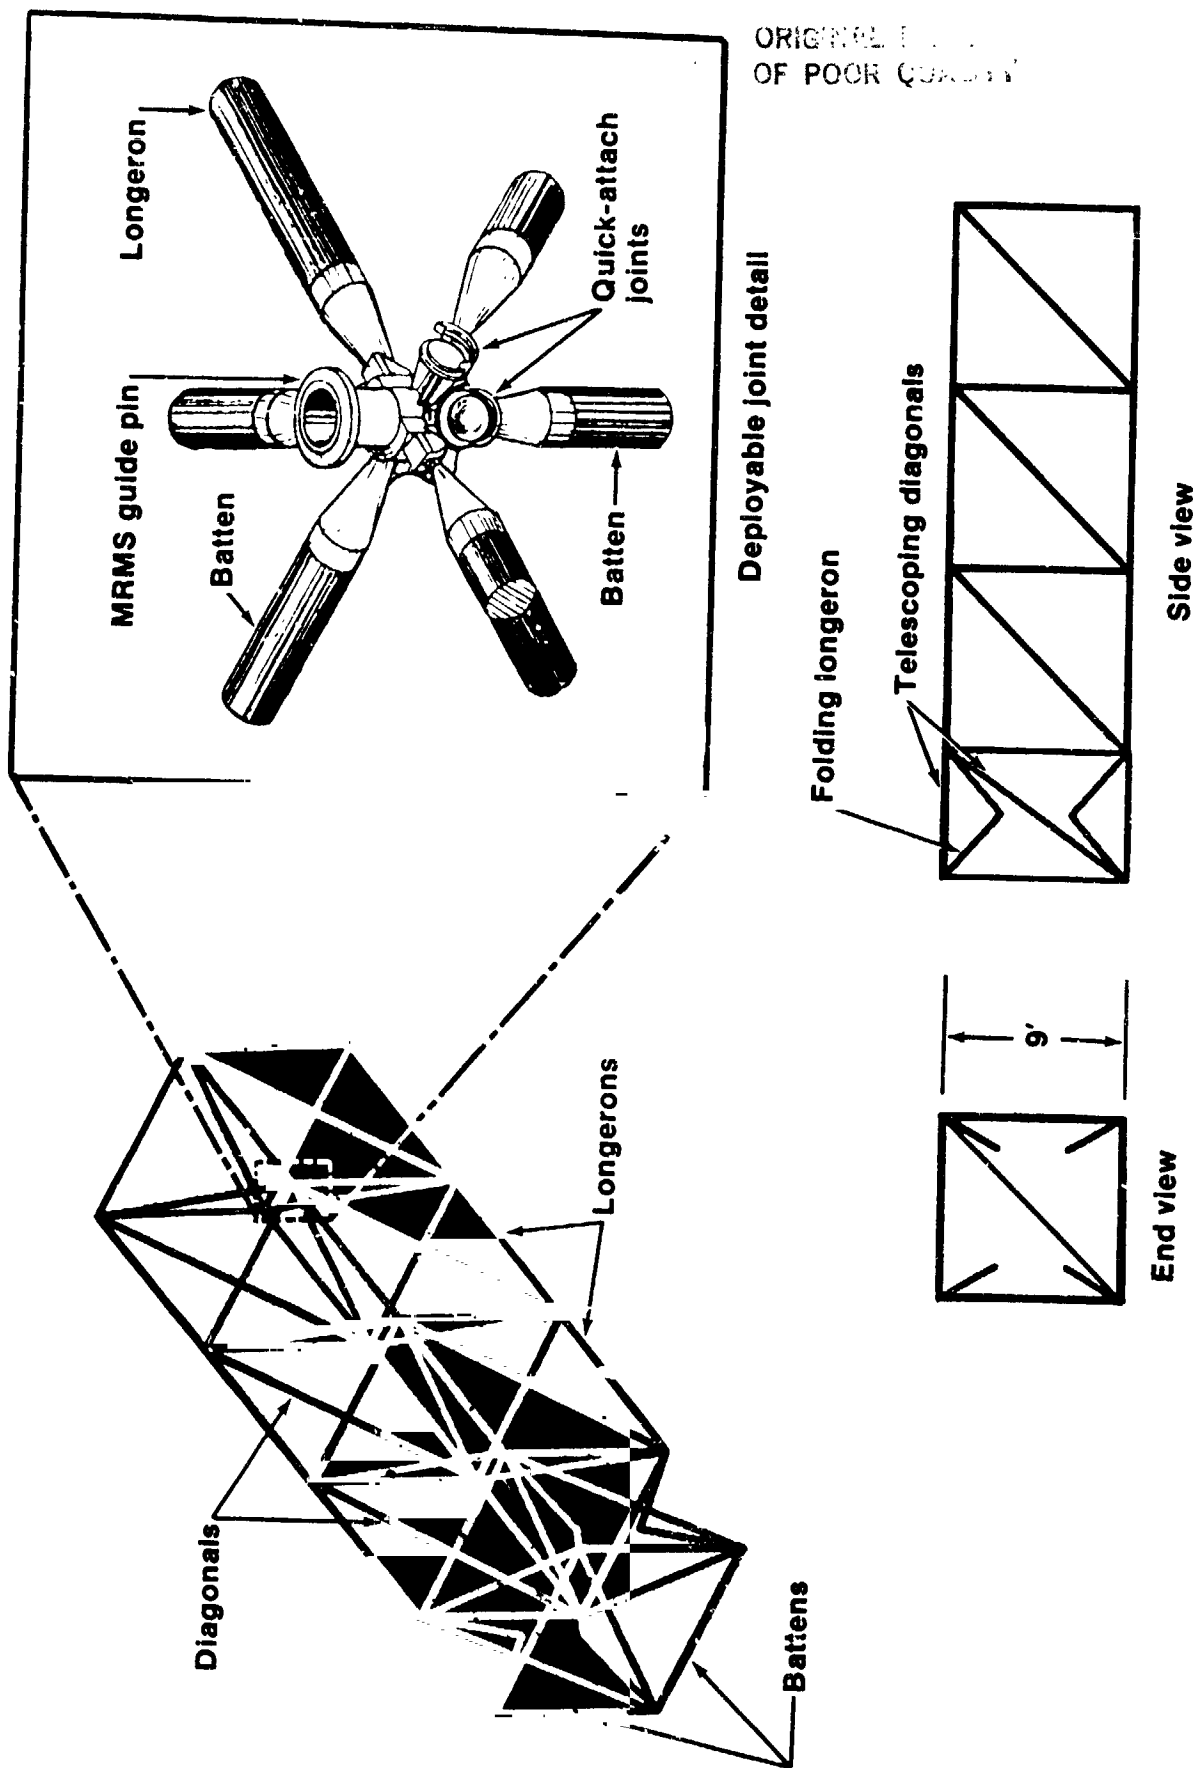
Schematic of deployable beam showing one bay being deployed and detail of joint.
